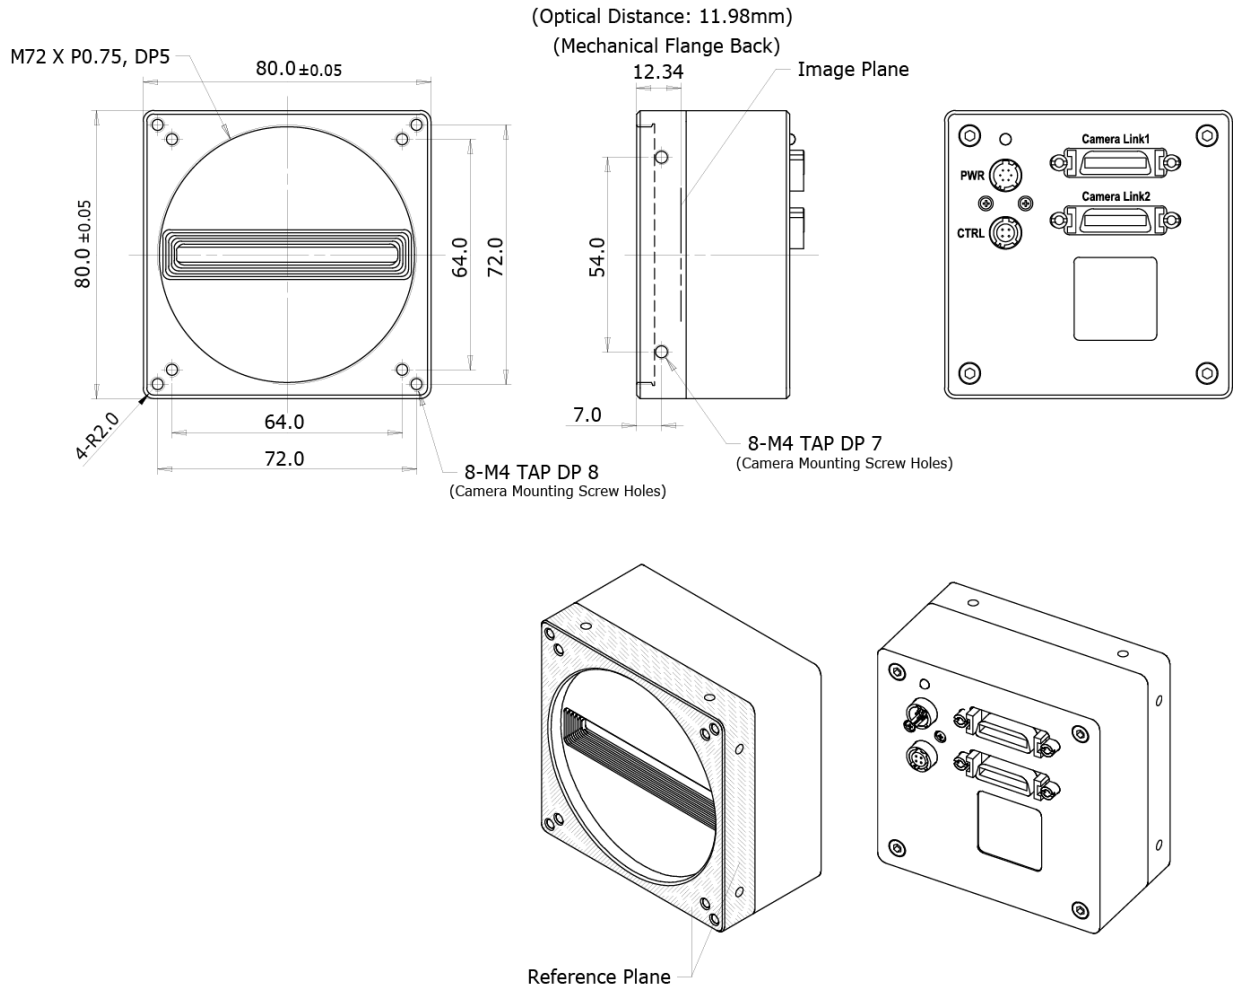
VL-8K7C-C80F-2 Mechanical Dimension
